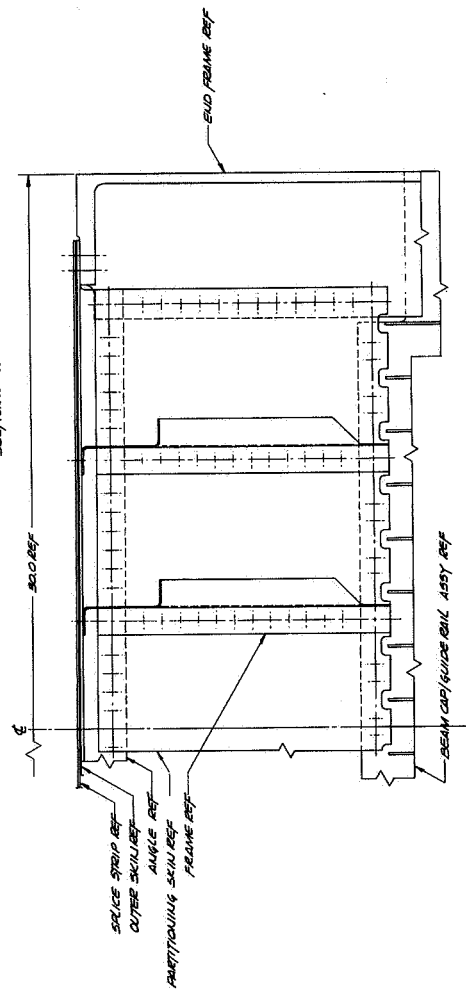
, 1. Main Rotational Frame and Arm/Counterweight Drive Frame Structural Assembly.
